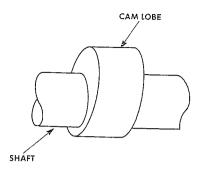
A camshaft is a shaft with a bump or lobe.
